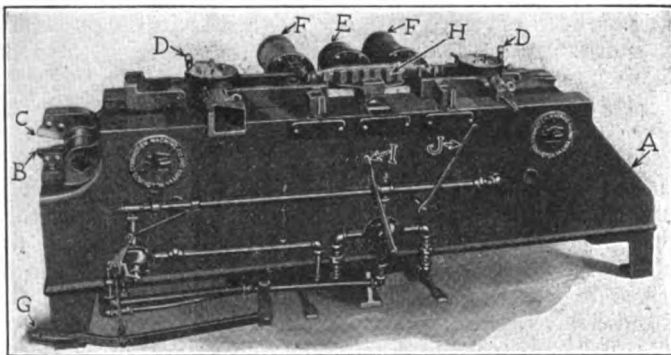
Covington machine set to remove the couplings from both ends of the hose at one operation
